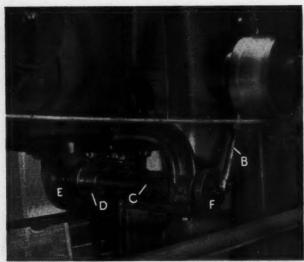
The drive arrangements for a shuttle-type feed unit for delivering workpieces from the magazine to the press tool on a machine in the bank. The rod B is connected to a frame which is oscillated by an eccentric on the press crankshaft
